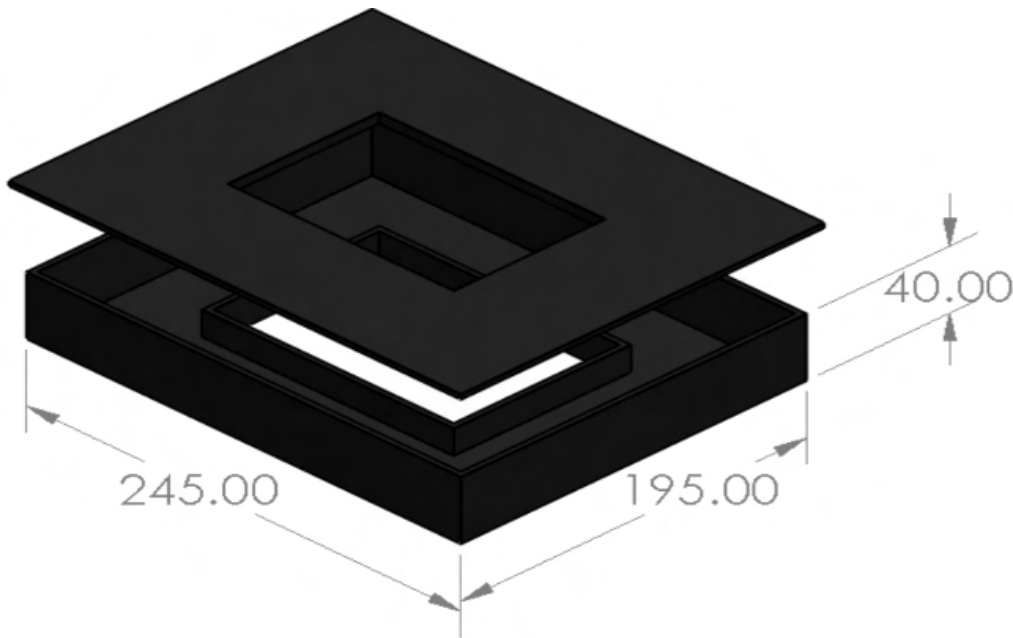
Hinge Top Acrylic Incubator drawing with dimensions in millimeters.
